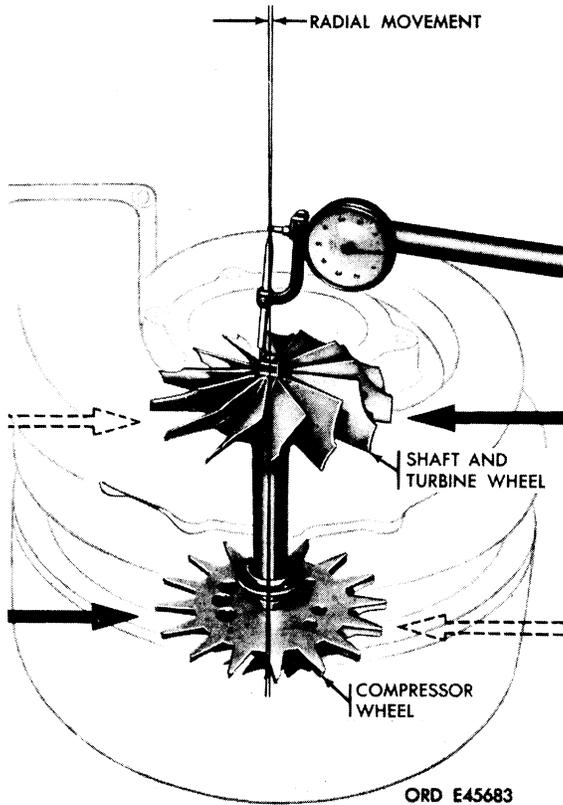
CHECKING SHAFT AND TURBINE WHEEL AND COMPRESSOR WHEEL RADIAL MOVEMENT.
